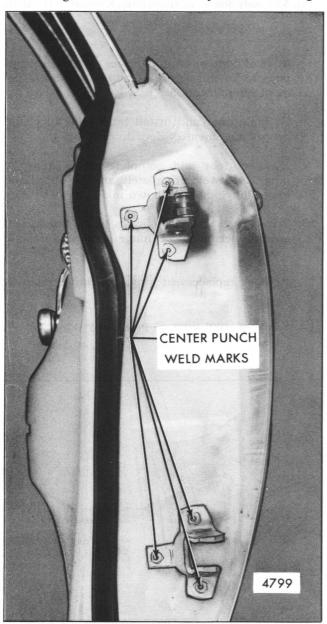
Typical Weld-On Hinge Attachment - "H" Styles
